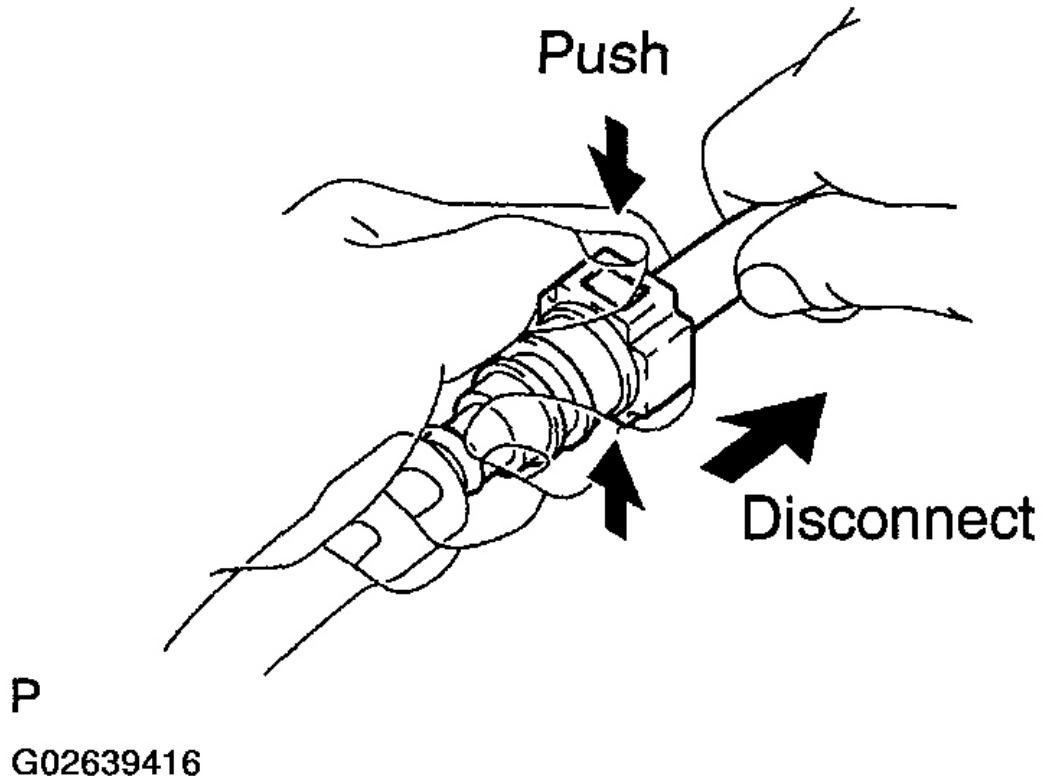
Disconnecting Fuel Inlet Tube From Fuel Pipe
